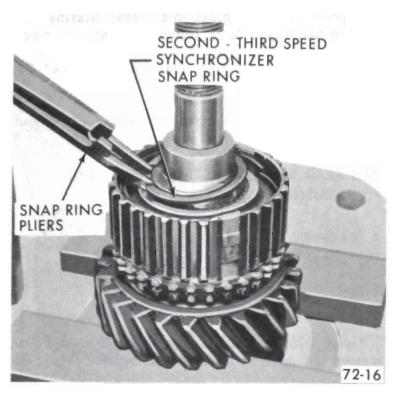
Removing Second-Third Speed Synchronizer Snap Ring
